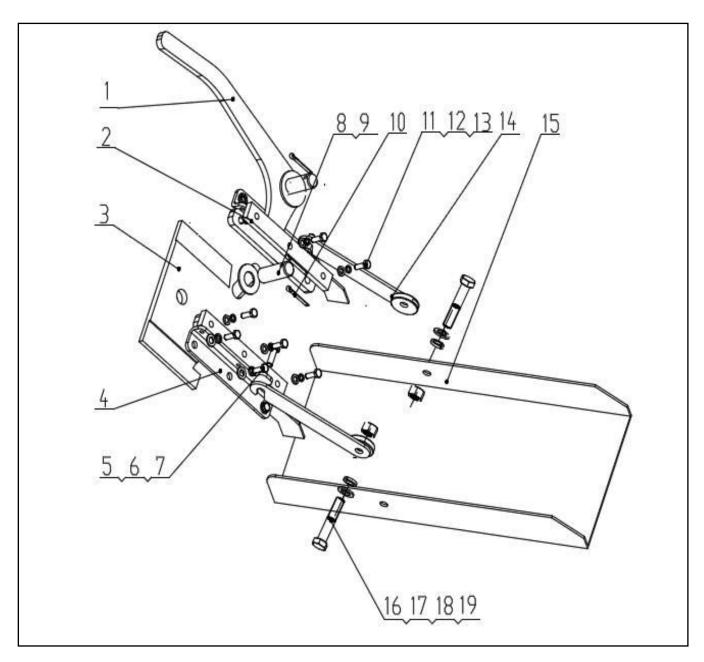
LATERAL DISCHARGE OPENING ASSEMBLIES
